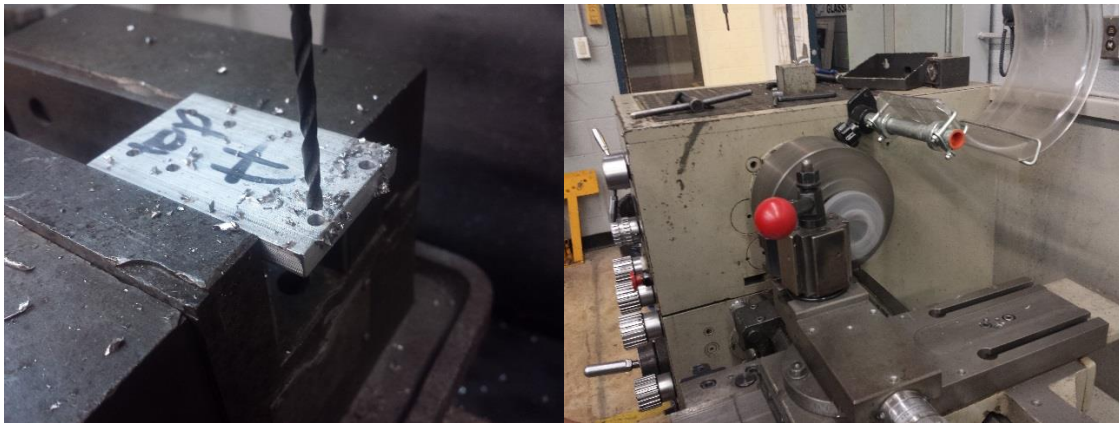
Knee Mill drilling hole (left), Lathe turning plastic (right)
